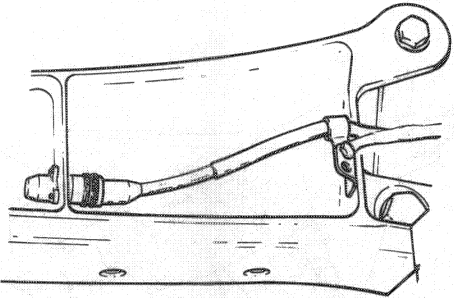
Engine Access Door Opening (Sheet 7 of 7)
